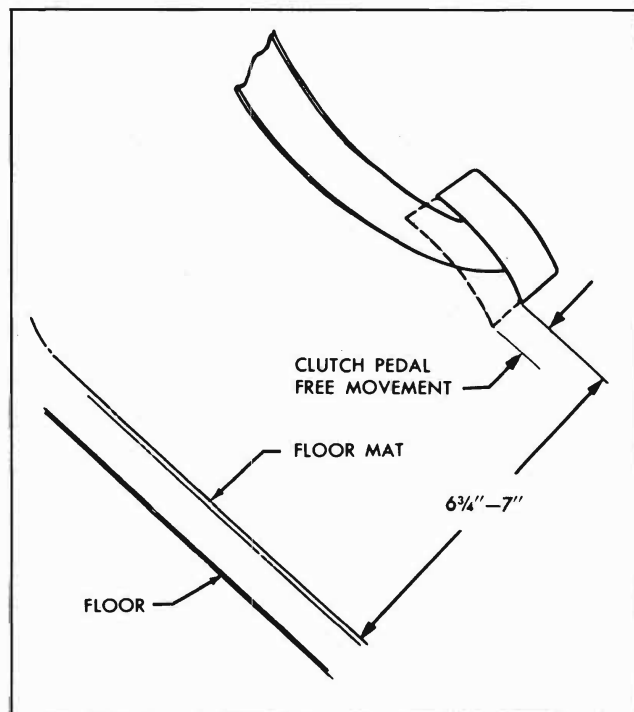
D-3 Proper Clutch Pedal Height and Clearance
